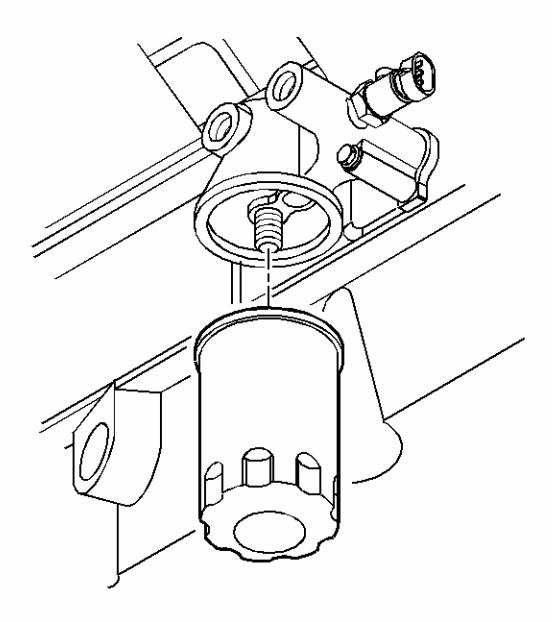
Locating Oil Filter Adapter & Filter Courtesy of GENERAL MOTORS CORP.
